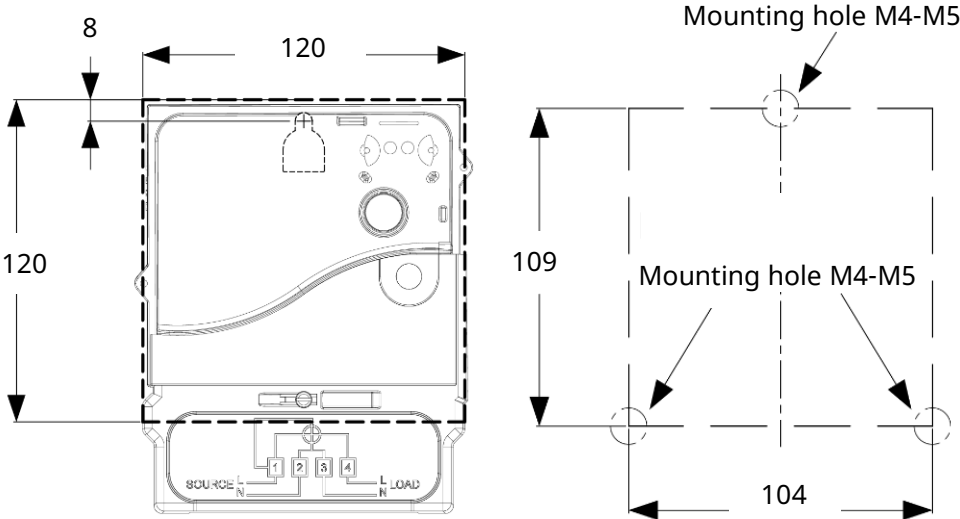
Panel cutout and Drilling point for installation (mm.)
